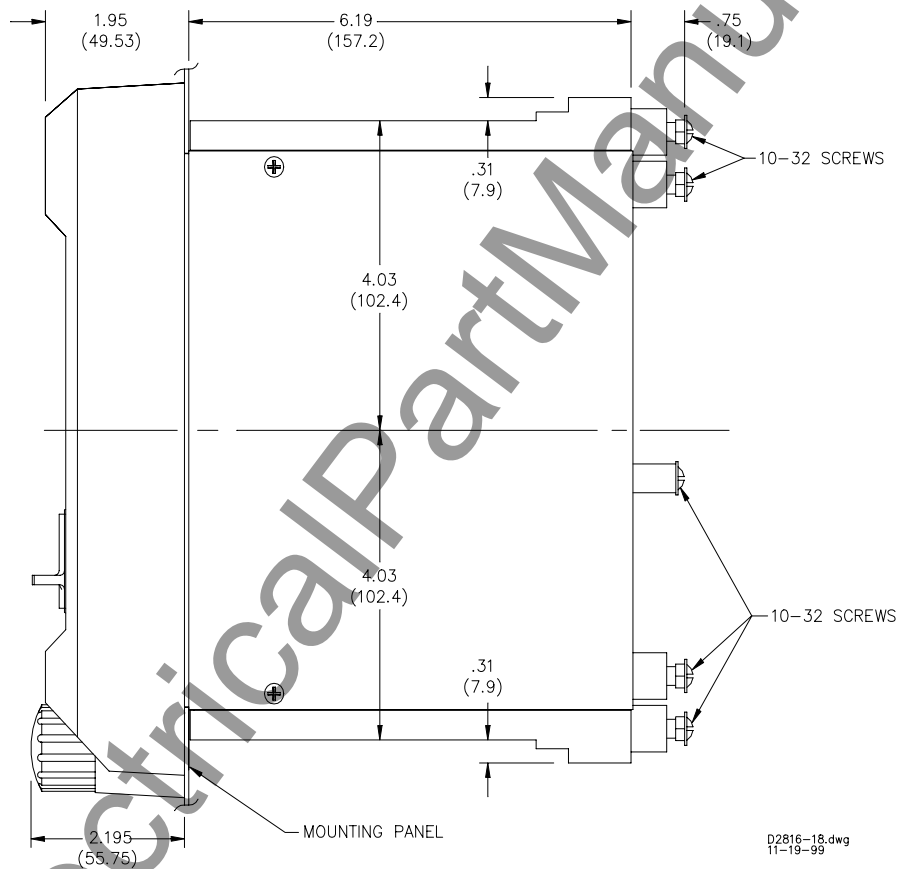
S1 Case, Double-Ended, Semi-Flush Mounting, Outline Dimensions, Side View
